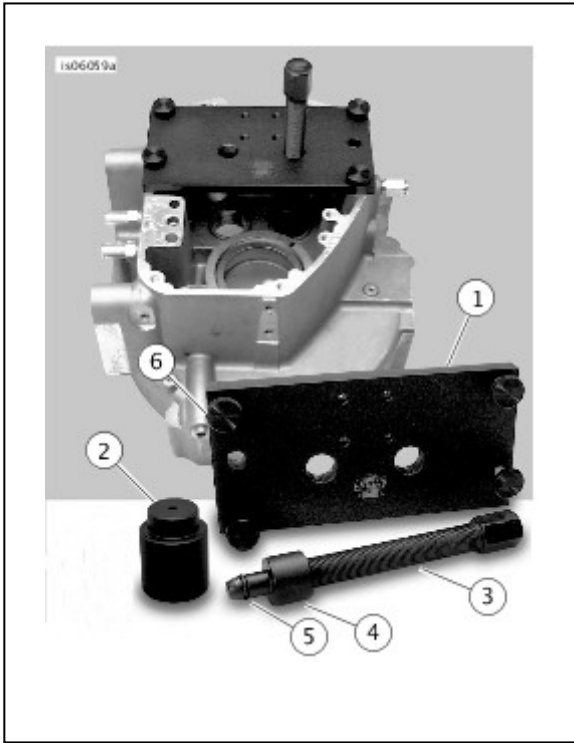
Service Parts: Inner Cam Bearing Installation Driver
